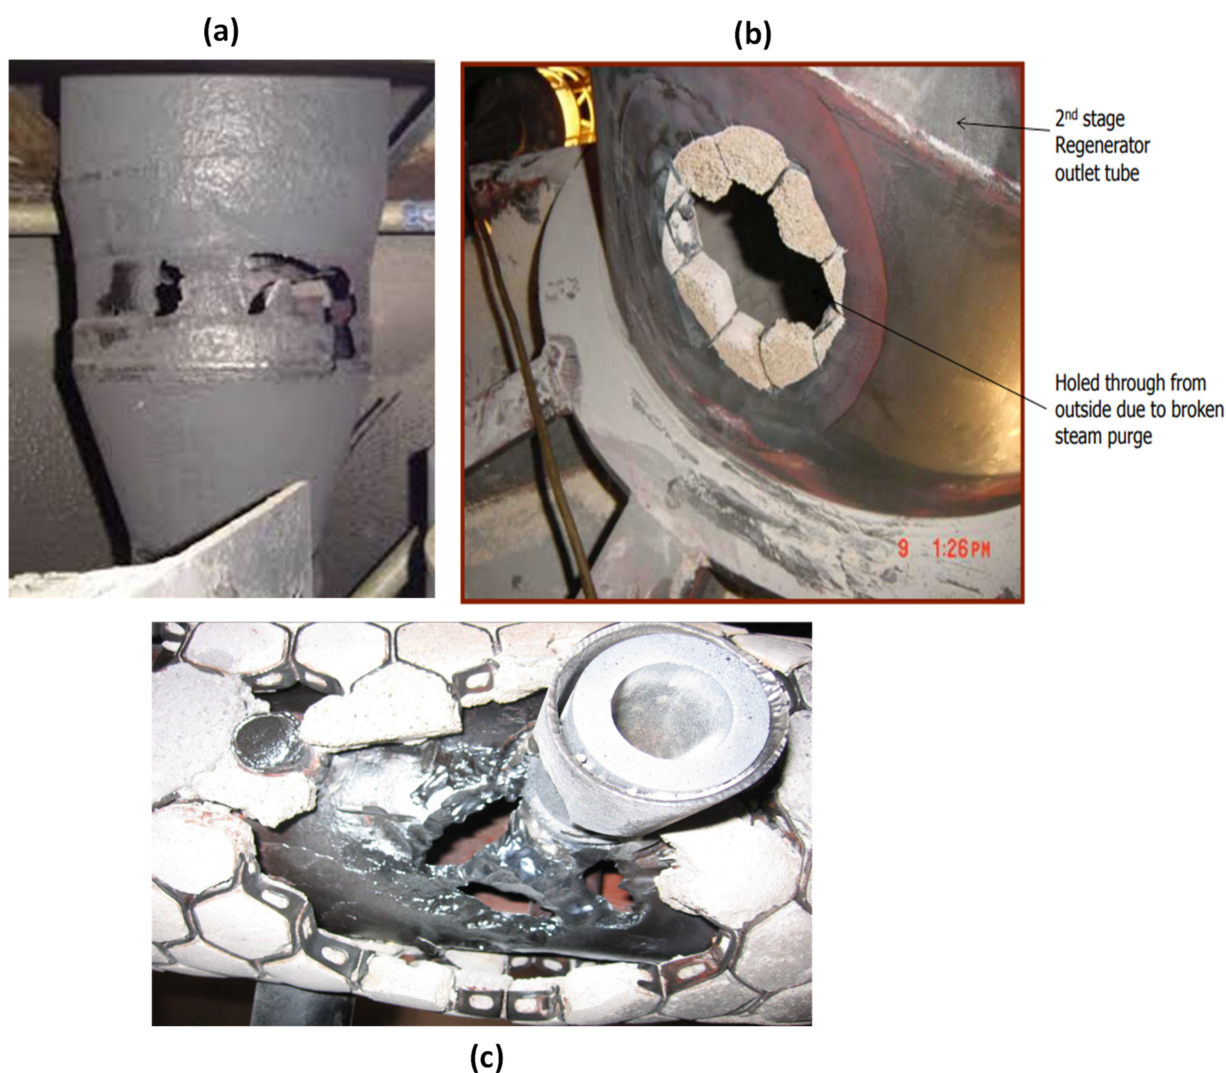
Severe high-temperature erosion impacts. (a) Cyclone inside-out wear; (b) steam purge inside-out wear; (c) eroded air distributor nozzle. Adopted from Chen [133] and Willbourne [225].
